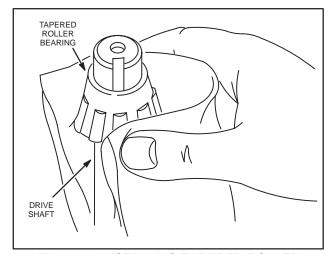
INSTALLING TAPERED ROLLER BEARINGS
